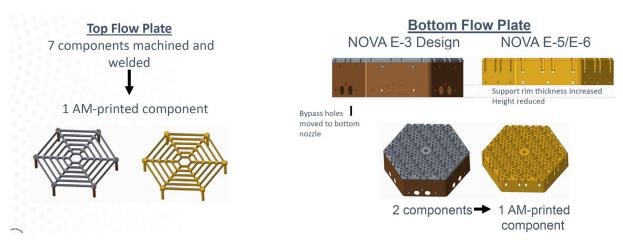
Top and Bottom Flow Plates Adapted to AM-manufacturing (3D-printing)
